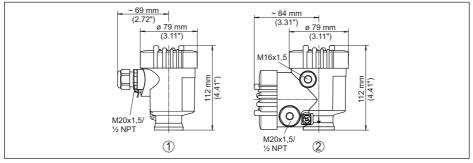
Housing versions in protection IP 66/IP 67 (with integrated display and adjustment module the housing is 9 mm/0.35 in higher)
